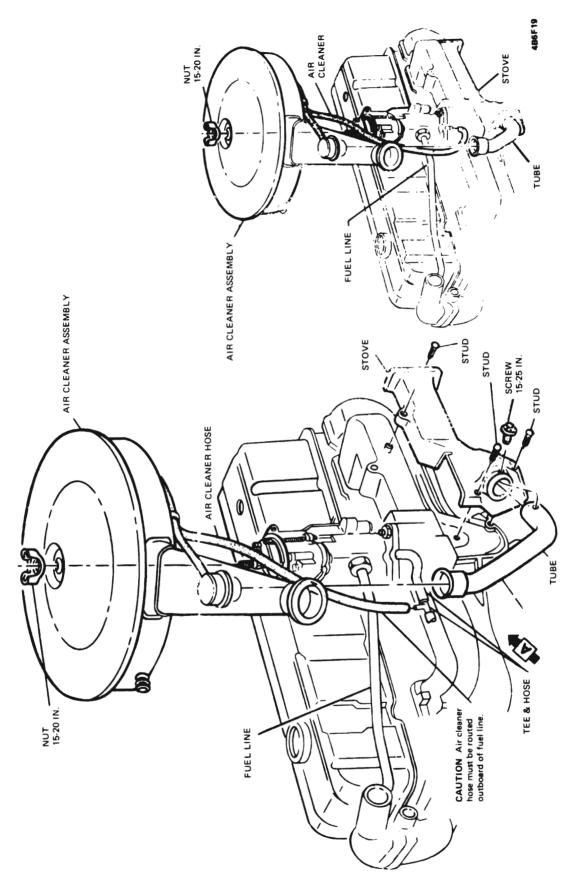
F-19 "X" Series Air Cleaner Hose Routing (L-6 Engine)
